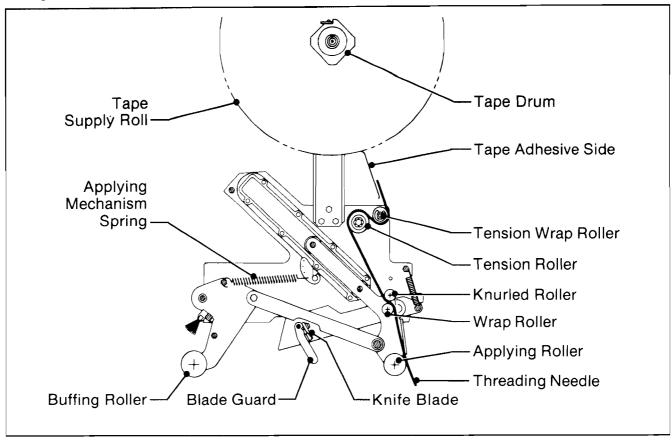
Tape Threading Diagram - Top Taping Head - Left Side View
